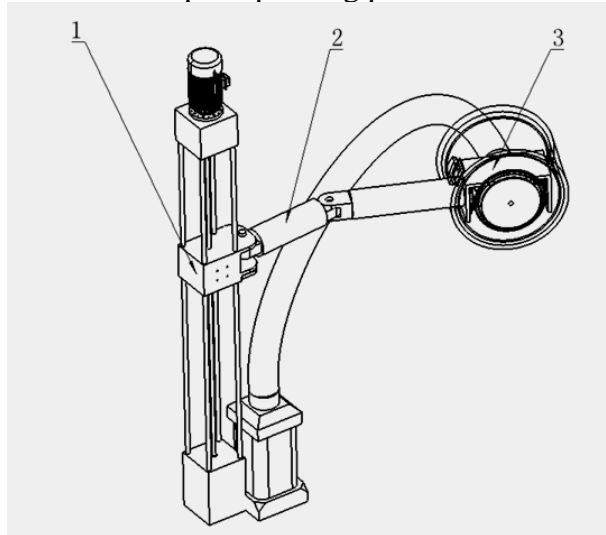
Grinding module: 1- Lifting table; 2- Robotic arm; 3- Dust-collecting grinding head.
